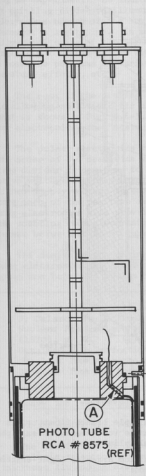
Tube base for #8575 photomultiplier. A refers to printed circuit board jack used to make connection to external electrostatic shield.
